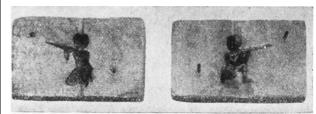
Plaster mould for casting a toy soldier. Left, a hollow half mould, right, the other half, with the casting in place.
